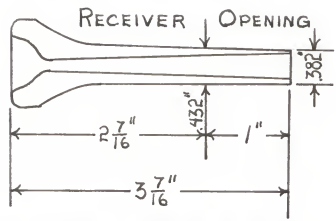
Outer Dimensions of Mouthpieces Used in the Research.
